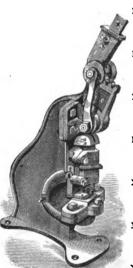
PUNCHING PRESS, WITH LEVER.
